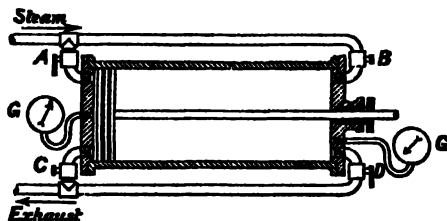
Cylinder with four separate cocks for distributing the steam.
